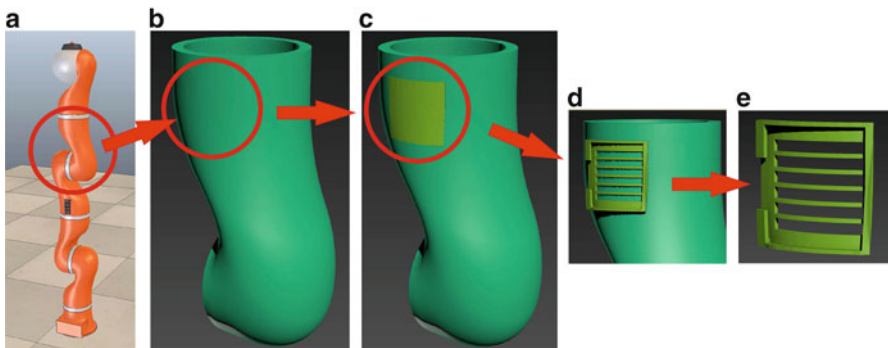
Sensor patch mechanical support: (a) KUKA LWR 4+ 3D model, (b) selected surface, (c) extruded shape, (d) designed support on robot link, (e) designed support
